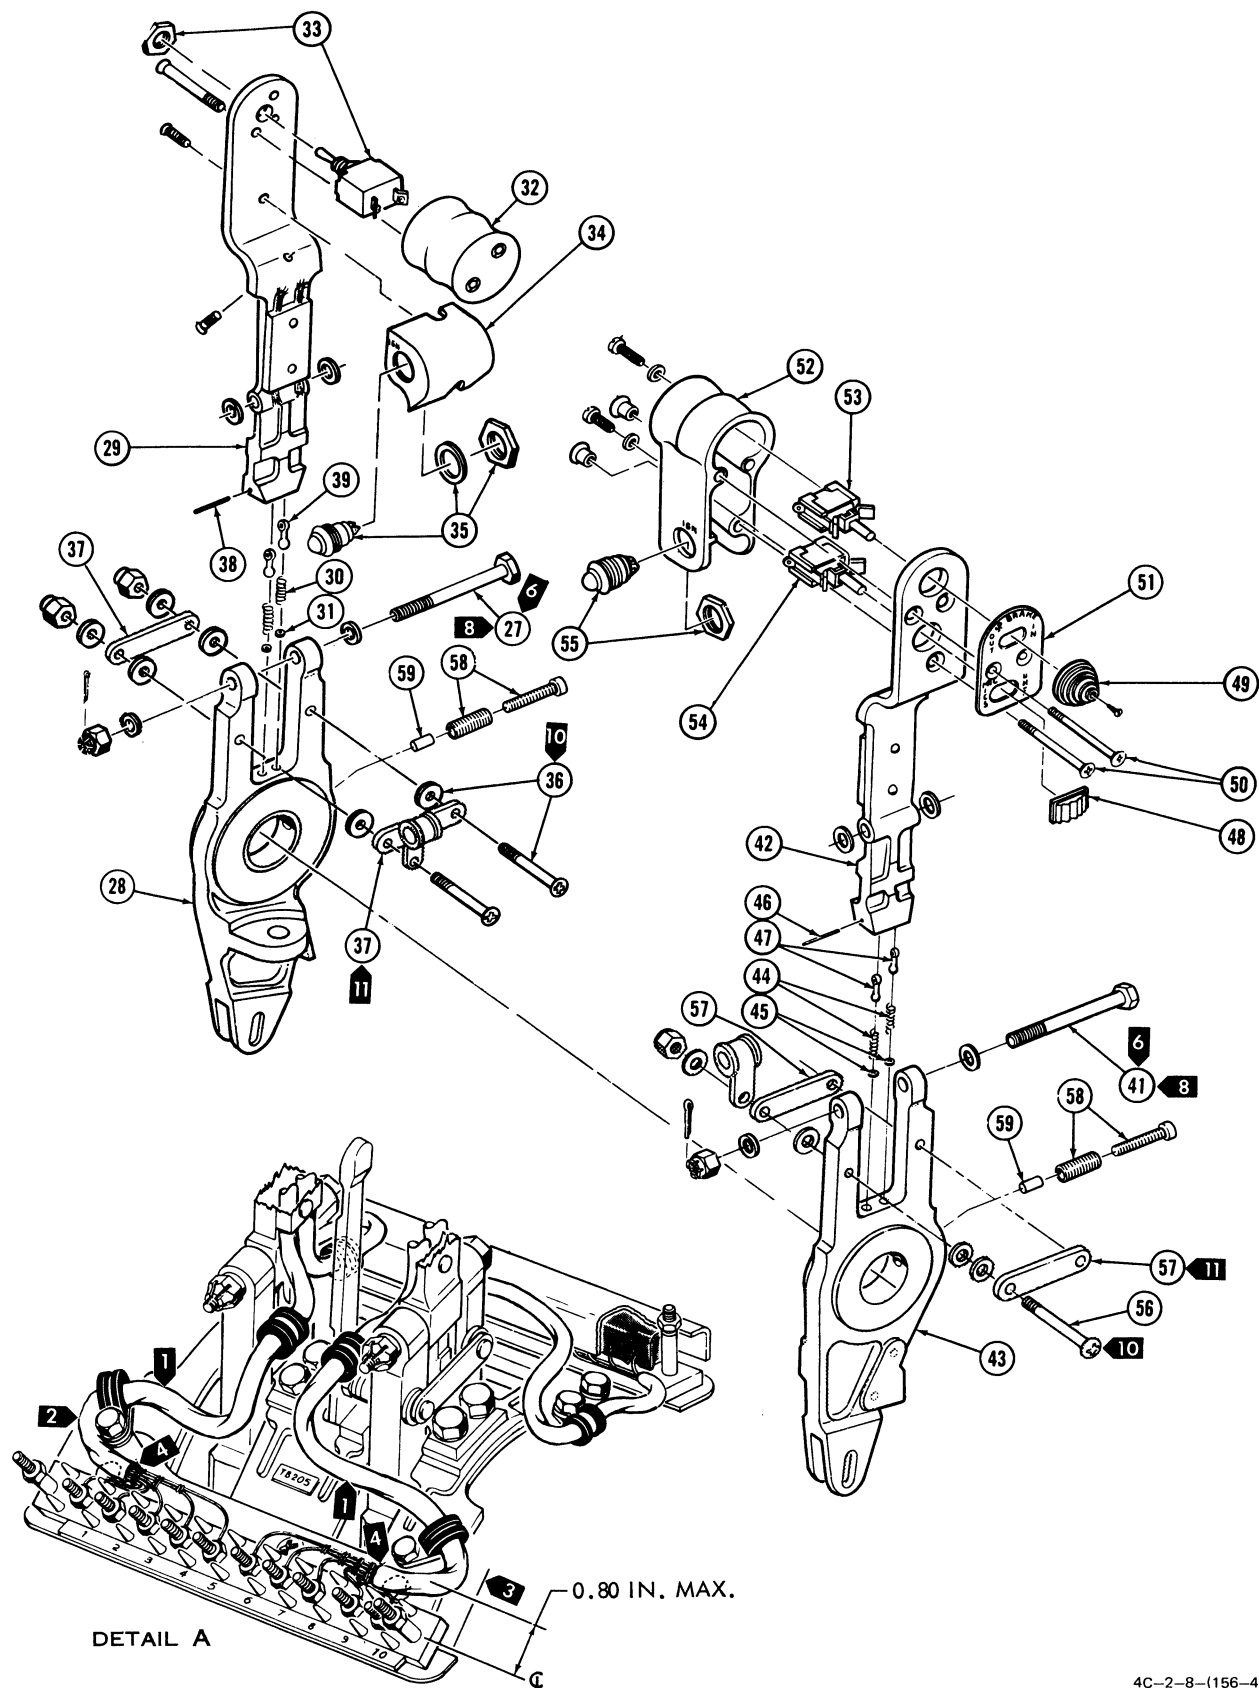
Forward Cockpit Throttle Quadrant Assembly and Adjustment -
